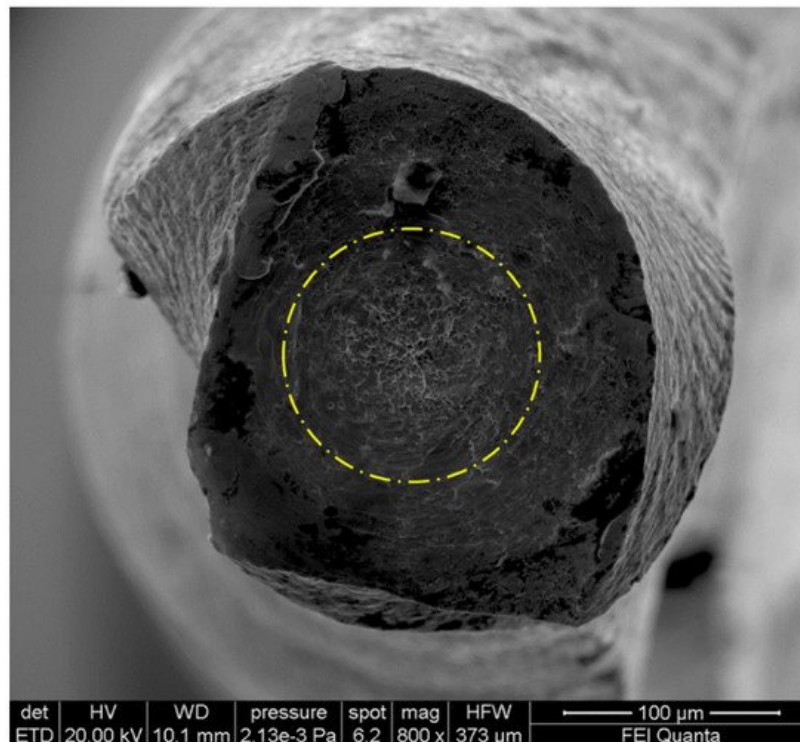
SEM image of fractured surface of a F-One #20 (Fanta Dental, Shanghai, China) in a transversal view at $\times 800$ magnification after torsional testing. The typical features of fracture arising from excessive torsional load, showing concentric circular abrasion marks and fibrous dimples near the center of rotation are evidenced by the round-shaped circumferential line.
